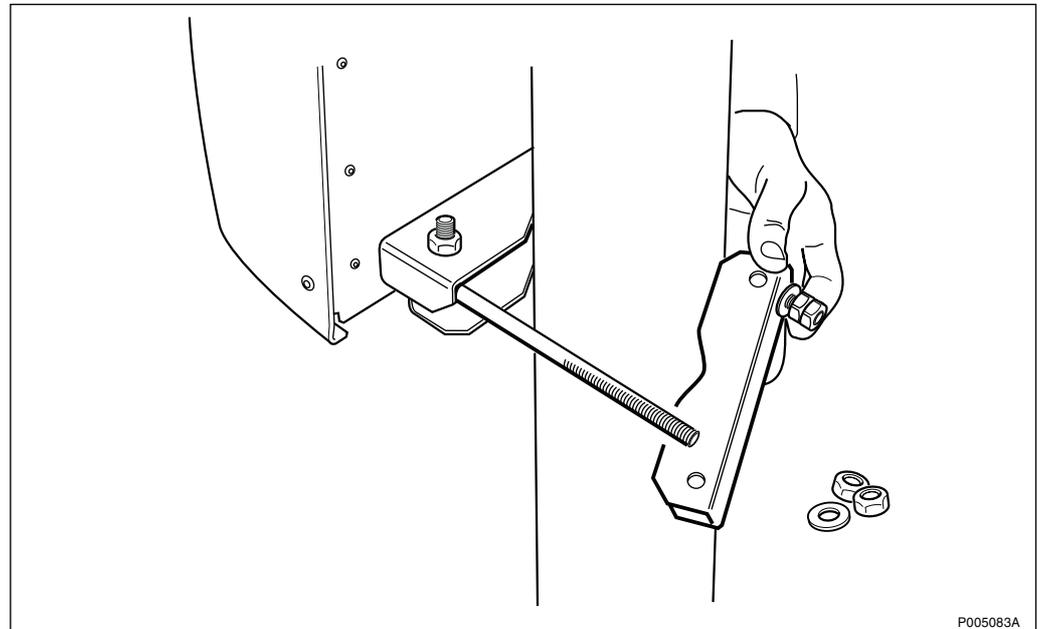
Putting the loose end of the lower mounting fixture clamp in place
